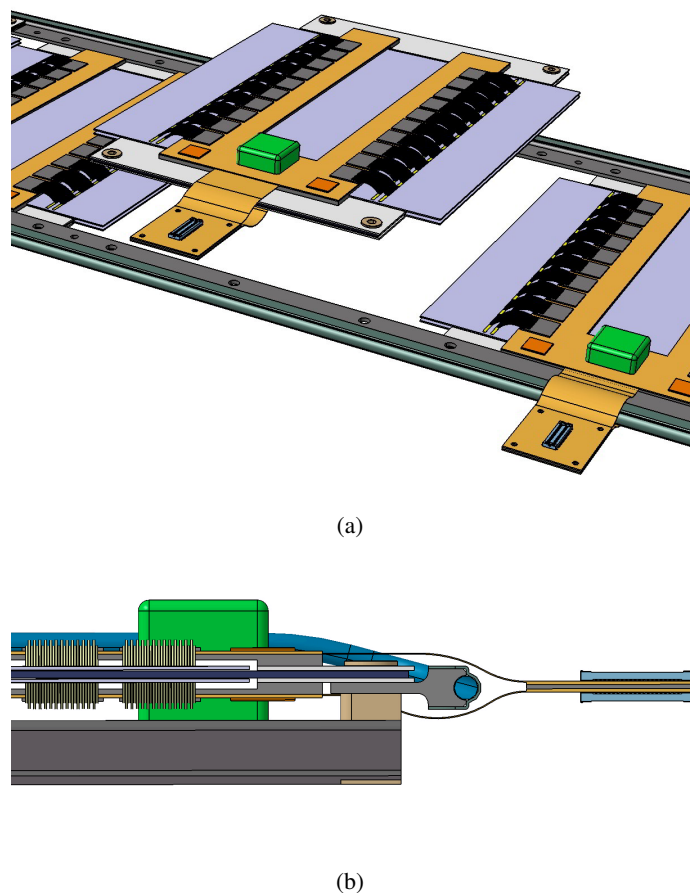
(a) Perspective (a) and cross-sectional (b) views of the DSM130 module attachment on the Carbon-Carbon (CC2D) cooling plate and the LS, together in (b) with the electrical module flex grounded to the cooling plate.
